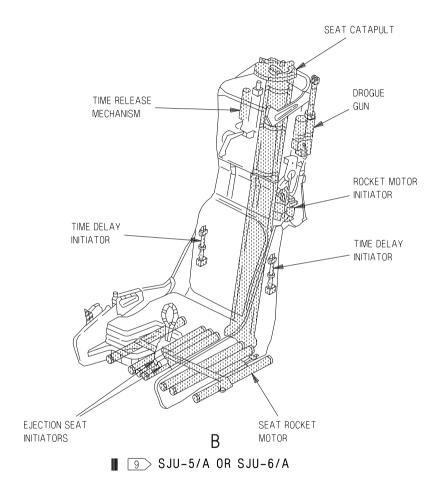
Flammable Liquids, Compressed Gasses and Explosive Devices (Sheet 3)
